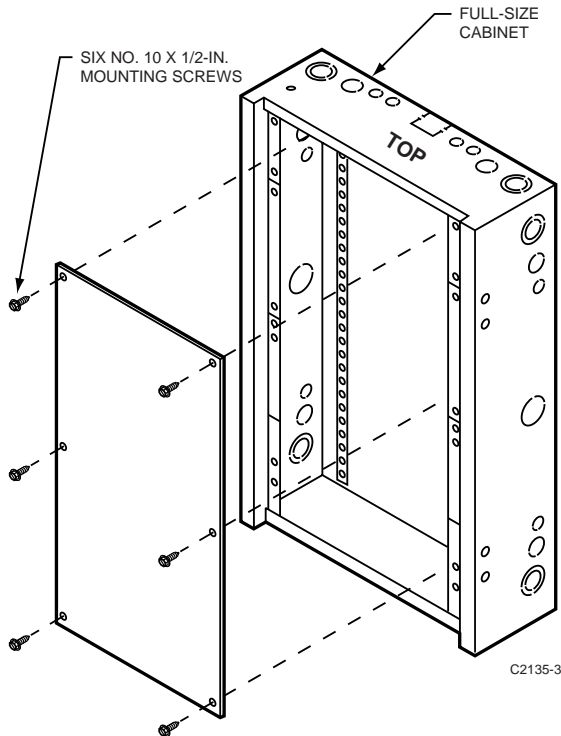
Mounting controller subpanel in cabinet (full-size subpanel, cabinet shown).
